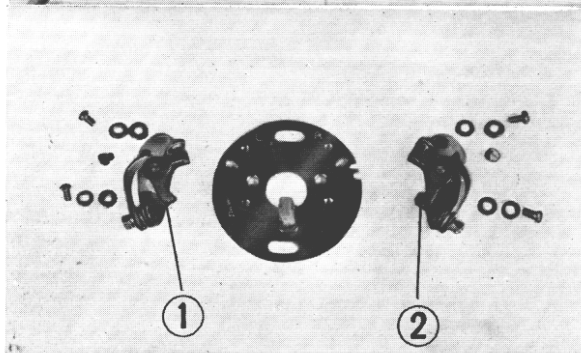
Contact breaker of Model CB72, 77-1 type
